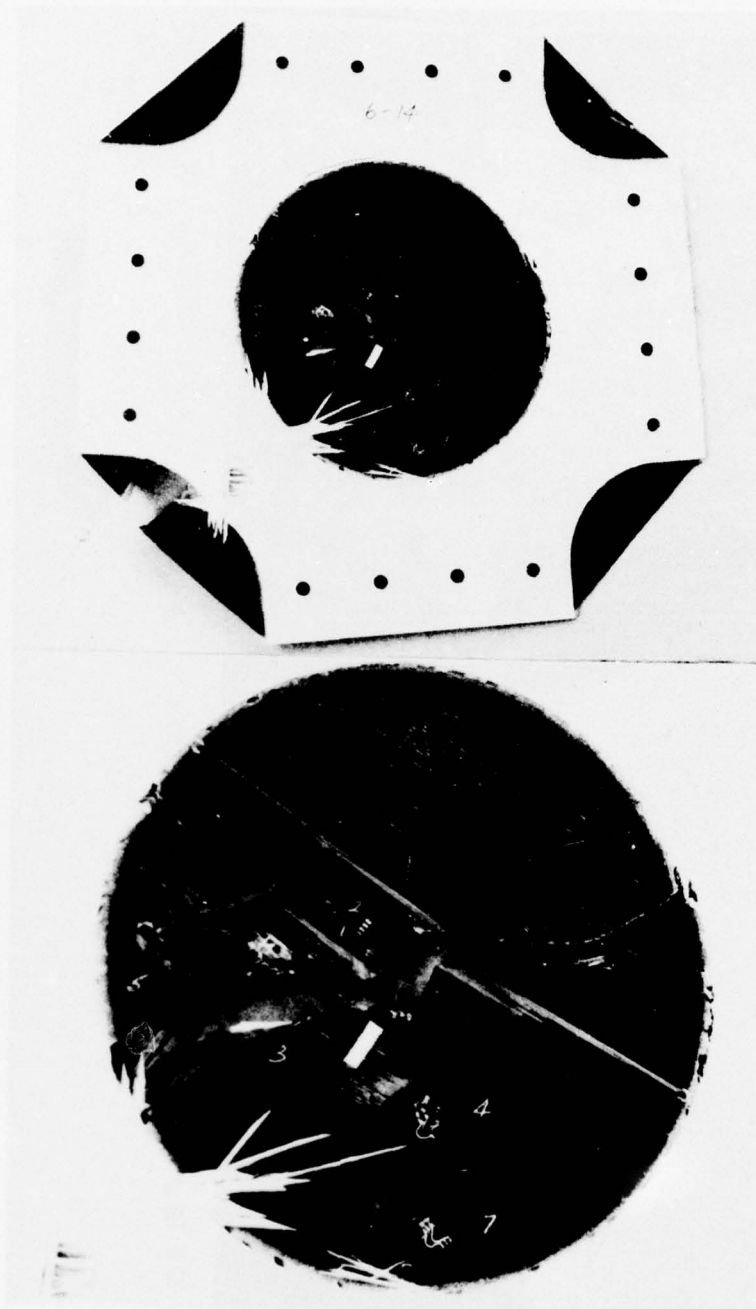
Biaxial Specimen with 1.91 cm (0.75 in.) Long Crack After Failure (Spec. No. 6-14).
